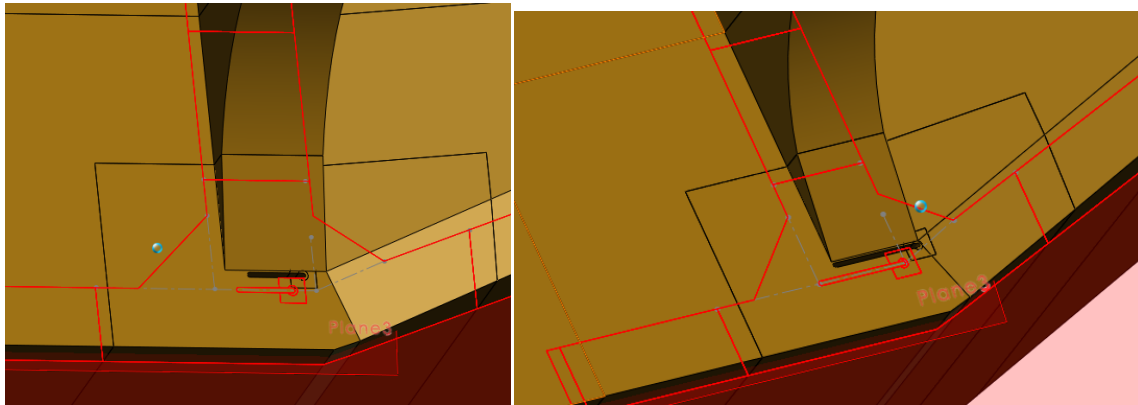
Modeling of root for fillet and partial penetrating weld in Solidworks
